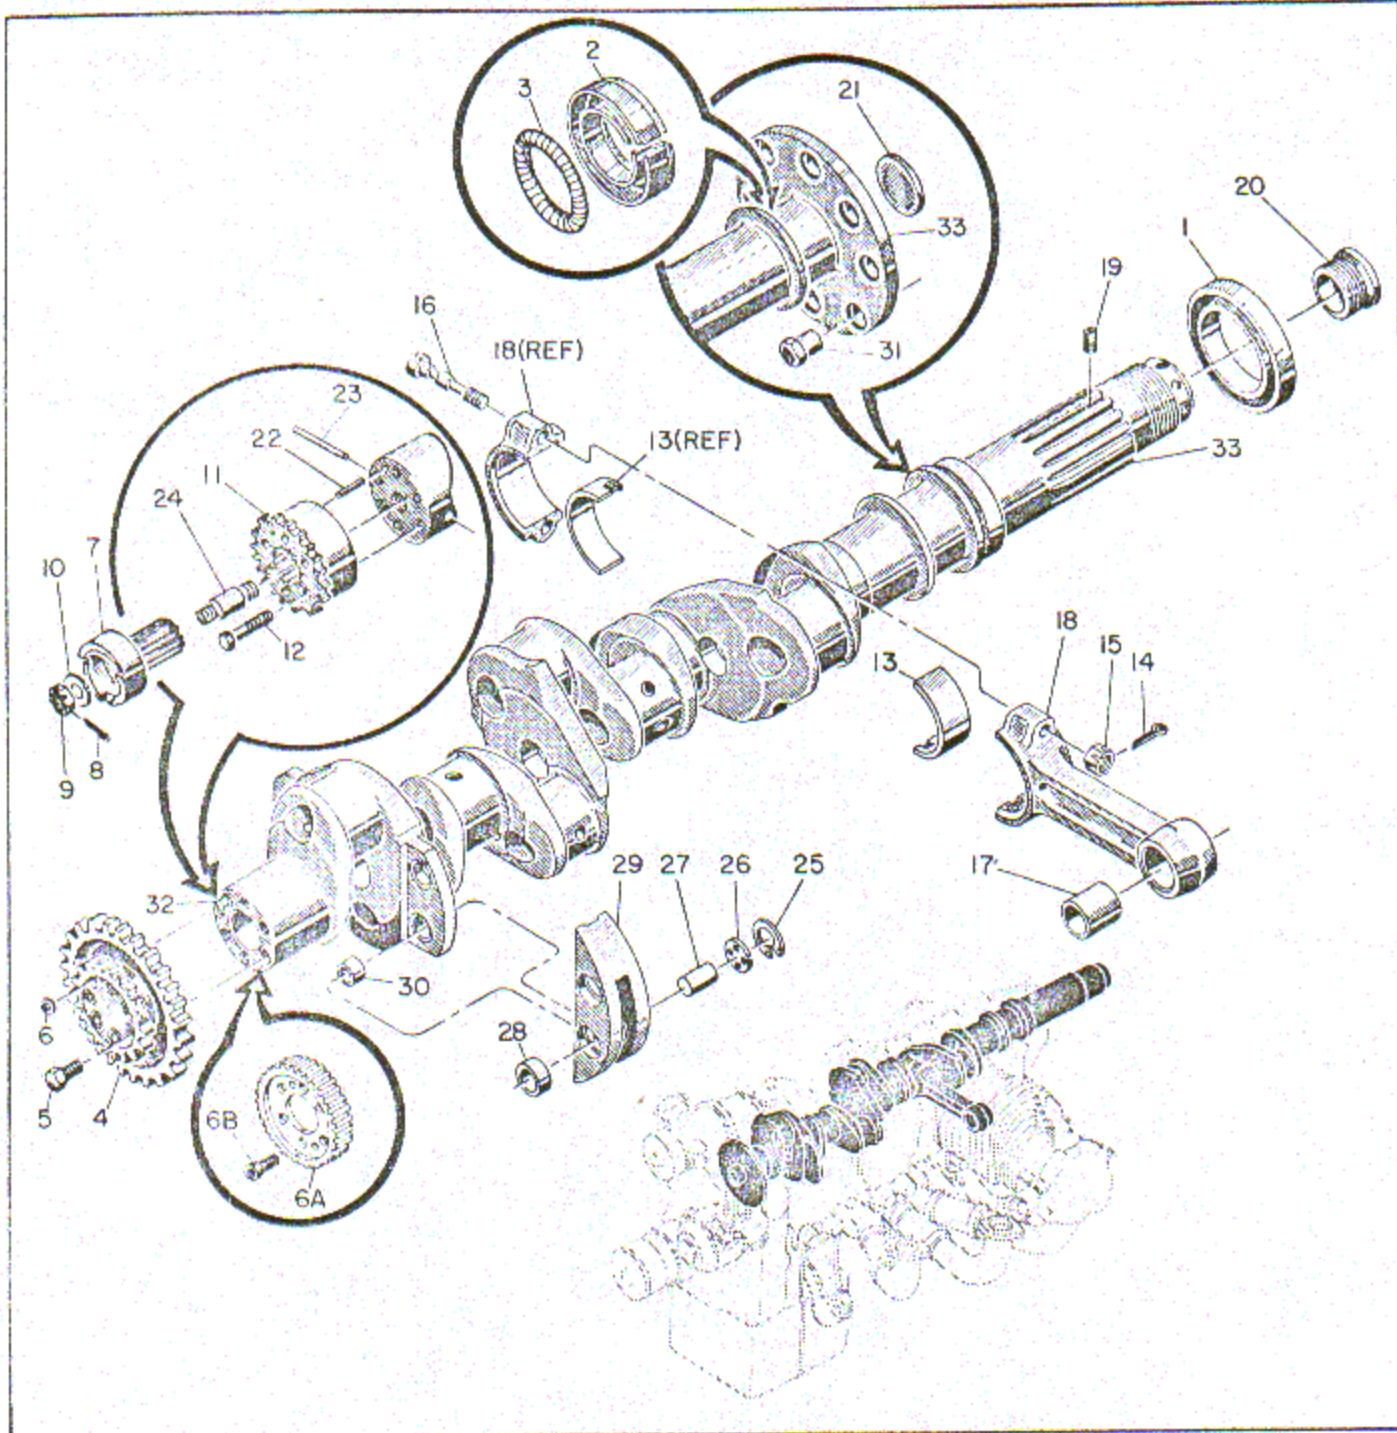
Exploded Parts View of Crankshafts and Connecting Rods
